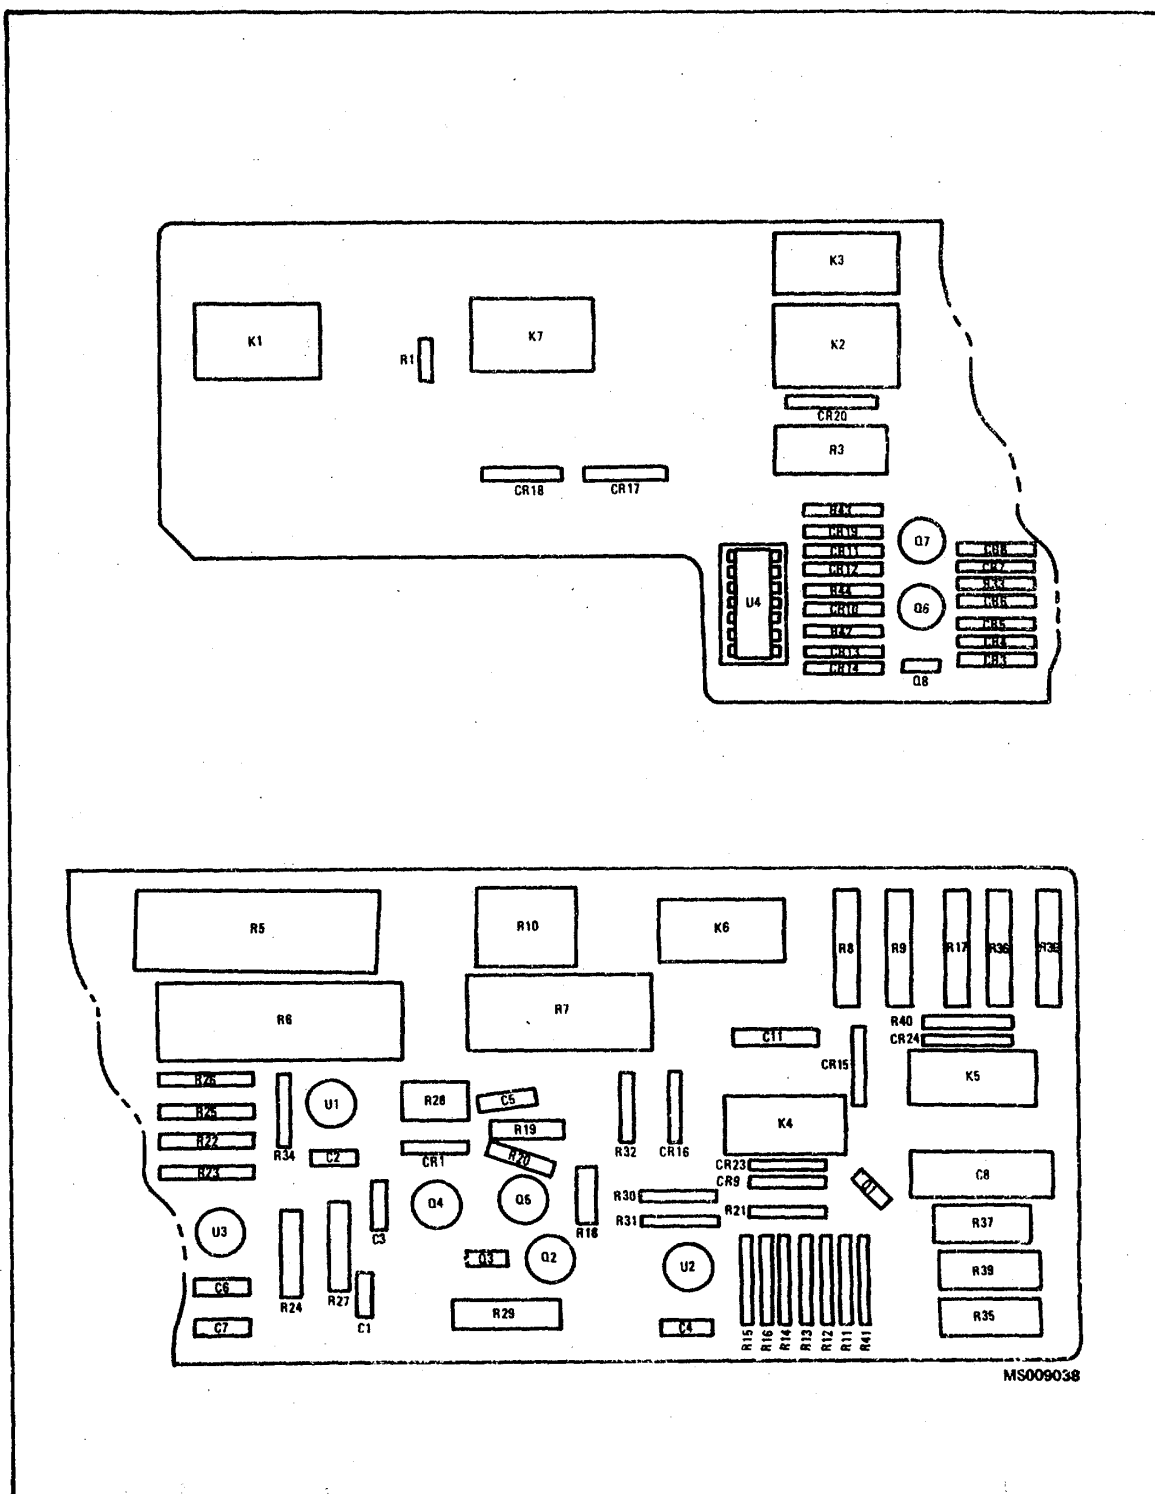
BUFFER AMPLIFIER PCB ASSEMBLY
